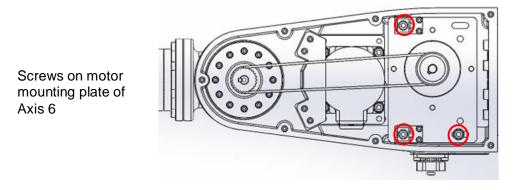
Screw Positions on Motor Mounting Plate of Axis 6 Timing belt
